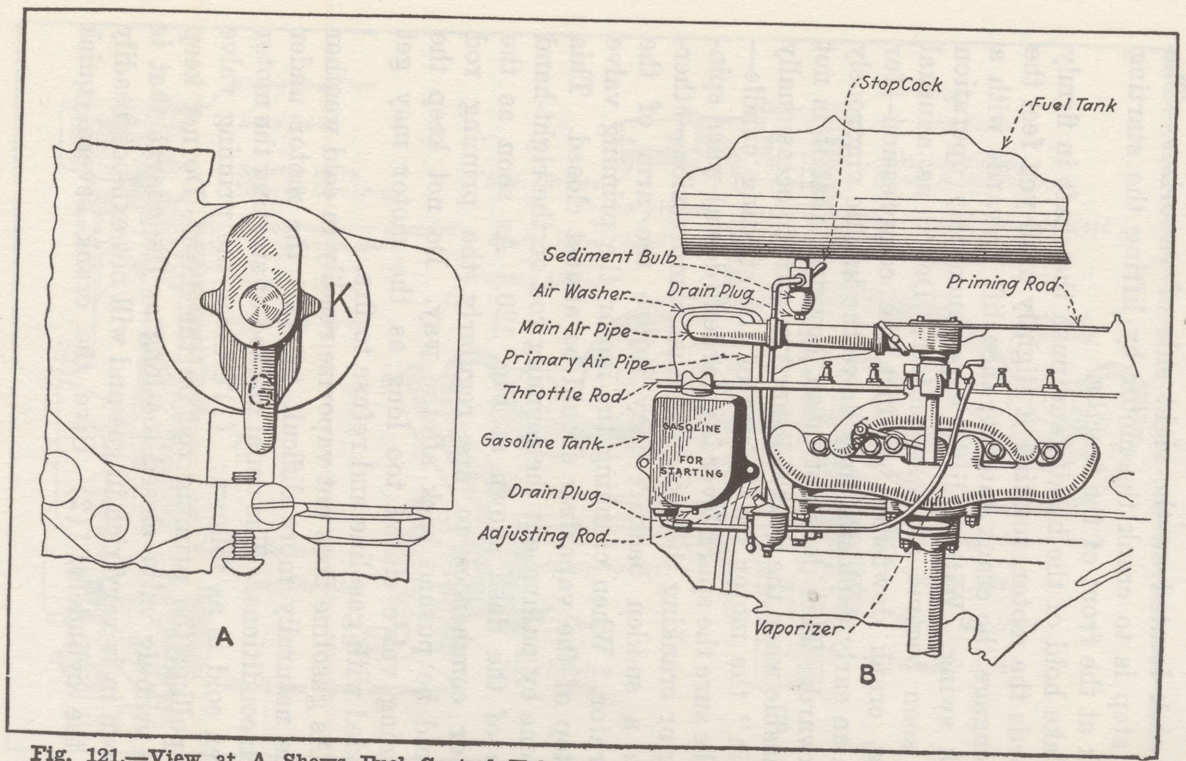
View at A Shows Fuel Control Valve That Supplies Either Gasoline or Kerosene to the Vaporizer. At B the Method of Installing the Vaporizer is Clearly Shown.
